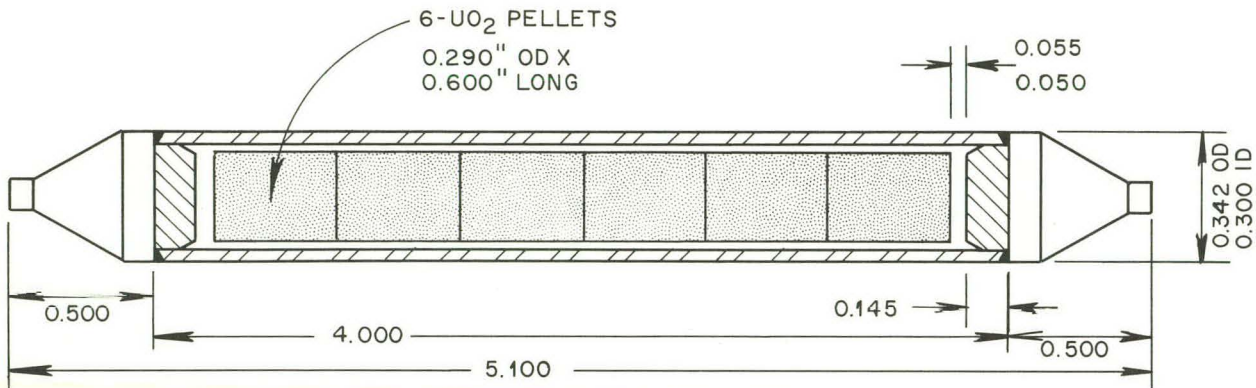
WCAP-1 and -2 radiation test-tube assembly (Type 316 stainless steel-clad, 2.7 or 5.4% enriched UO₂ pellets.)
